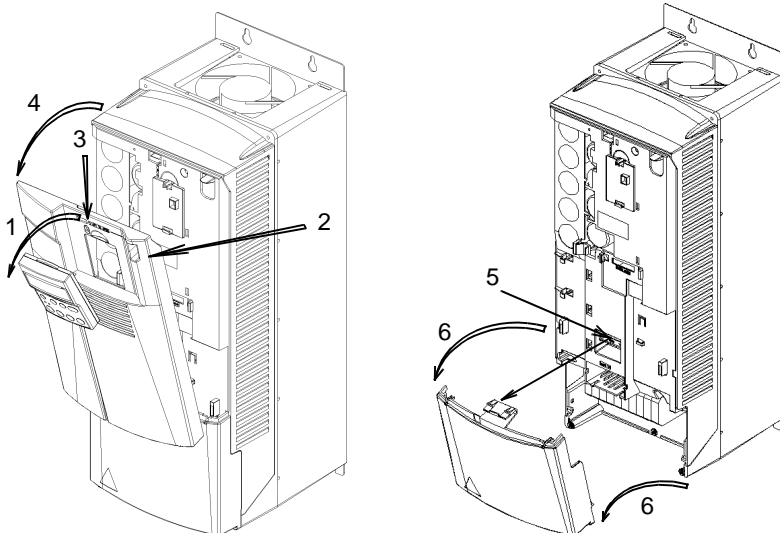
Opening the frame size R3 and R4 size drives of type IP 21/ NEMA 1.
